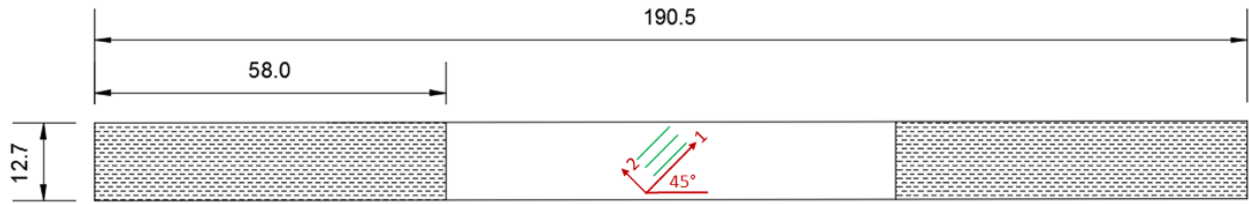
Specimen geometry and layout (ASTM D3039 geometry).
